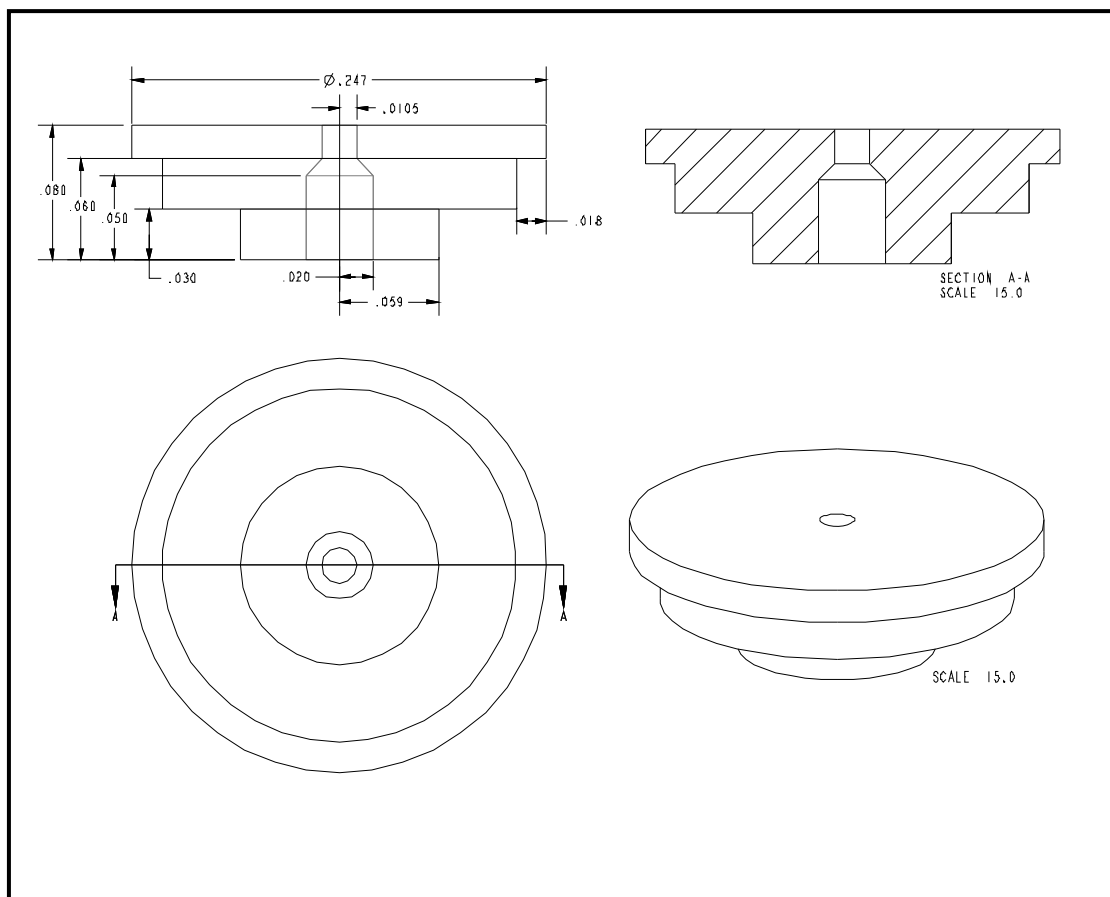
CAD Drawing of the SPP Prototype – Air Cooled Nozzle Outer Tip
